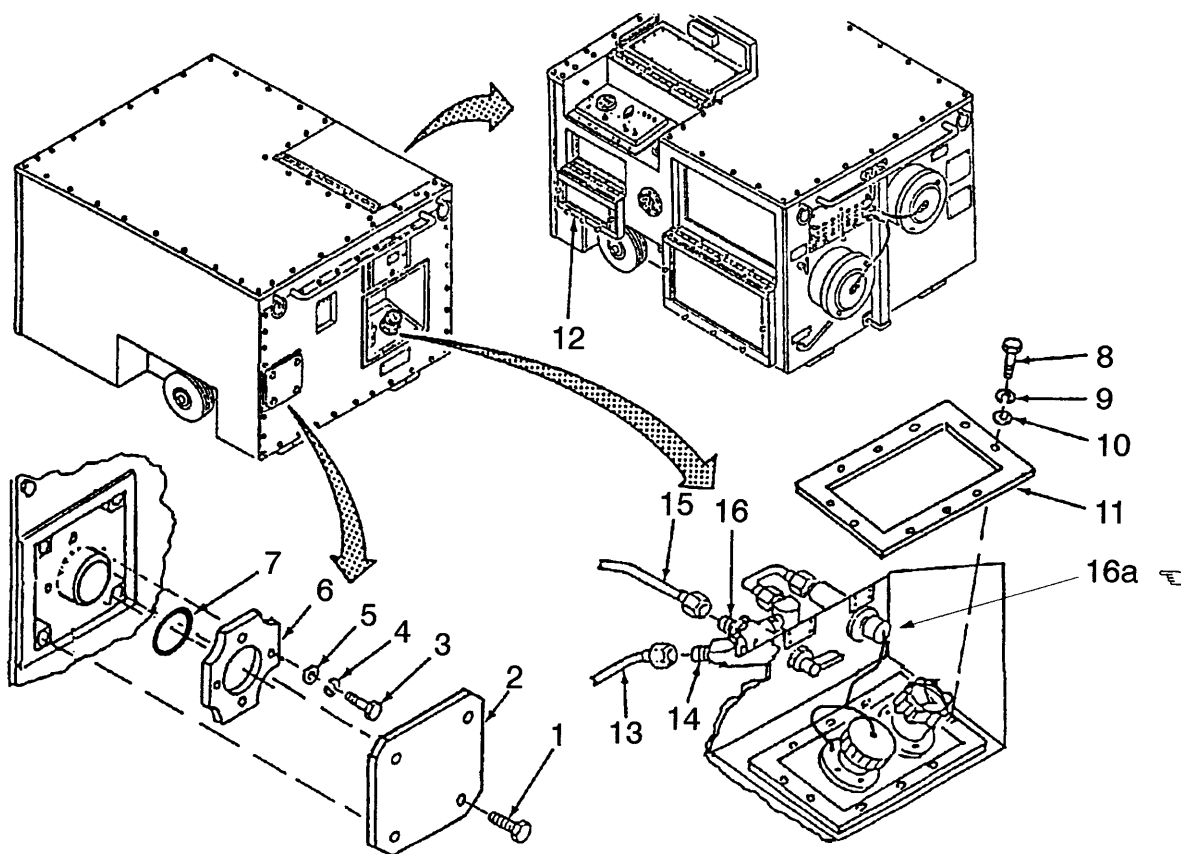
Rear Panel Assembly Removal (Sheet 1 of 2)
